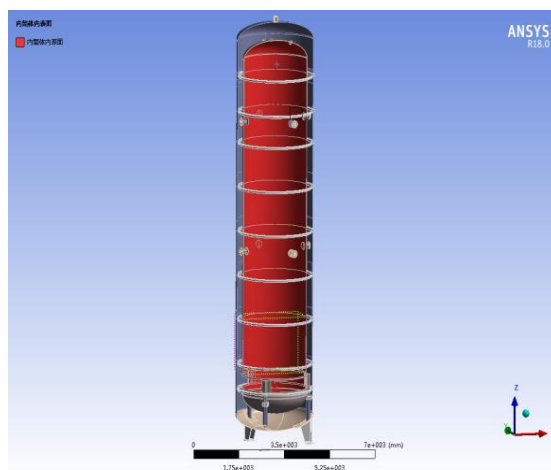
Geometrical model of the cryogenic storage tank(half sectional view).
